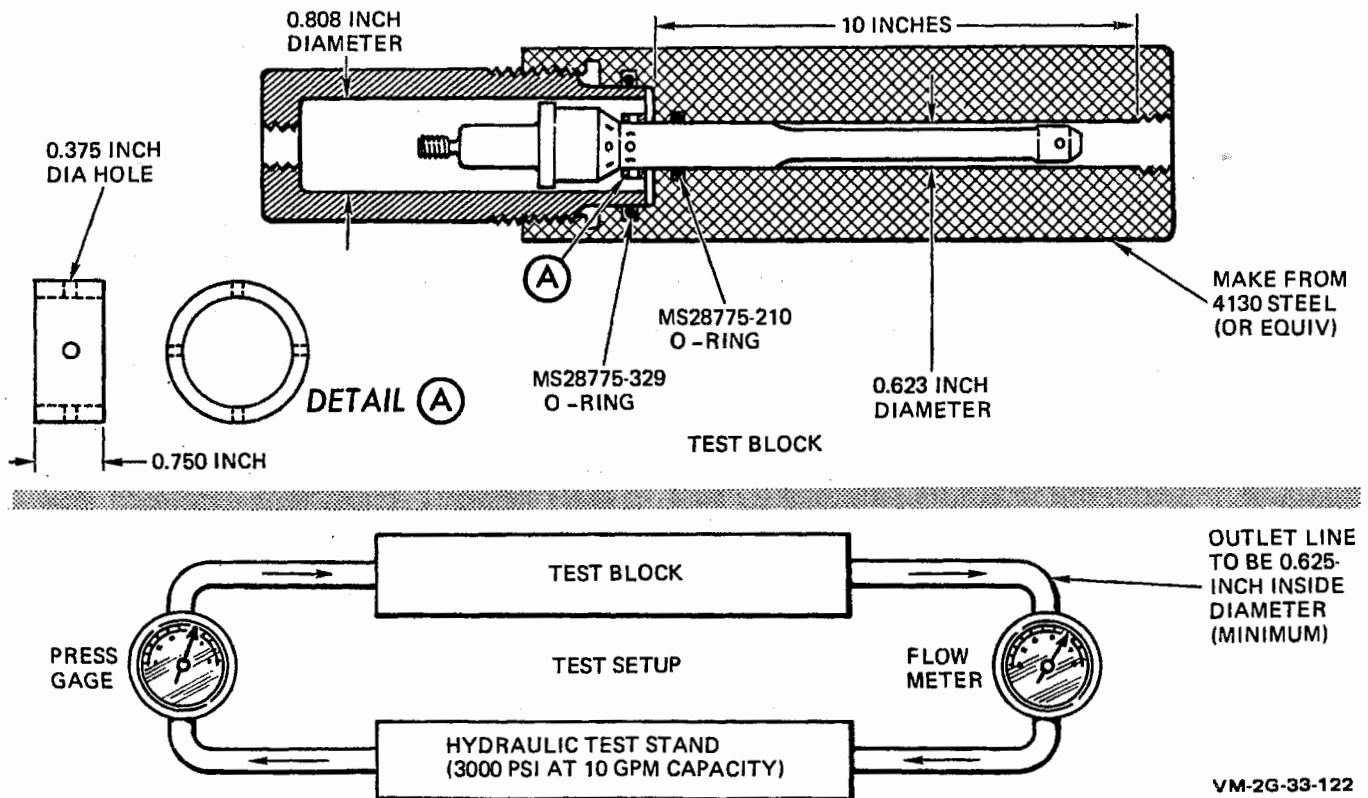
Main Landing Gear Relief Valve Test Block and Test Setup
